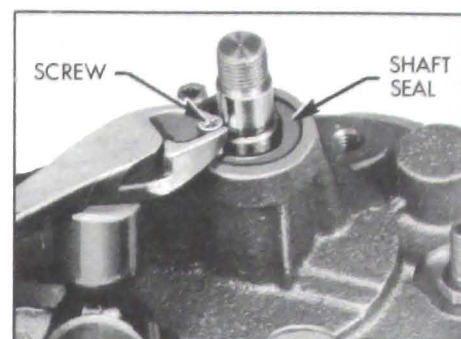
Removing Shaft Seal Without Disassembling Pump
